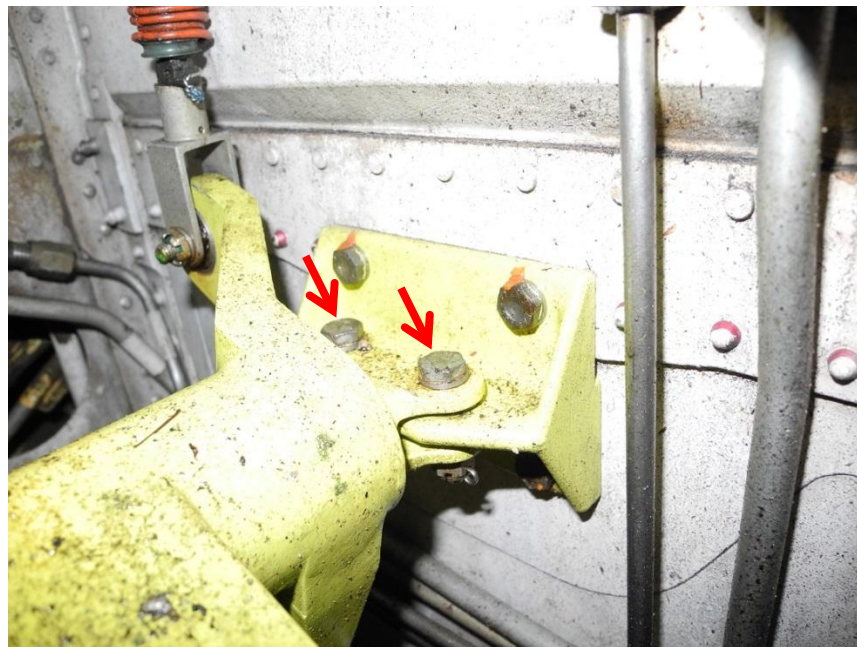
A view of the bolted connection between the support bracket and the torque shaft. The red arrows point to the two bolts securing the torque shaft to the support bracket.
